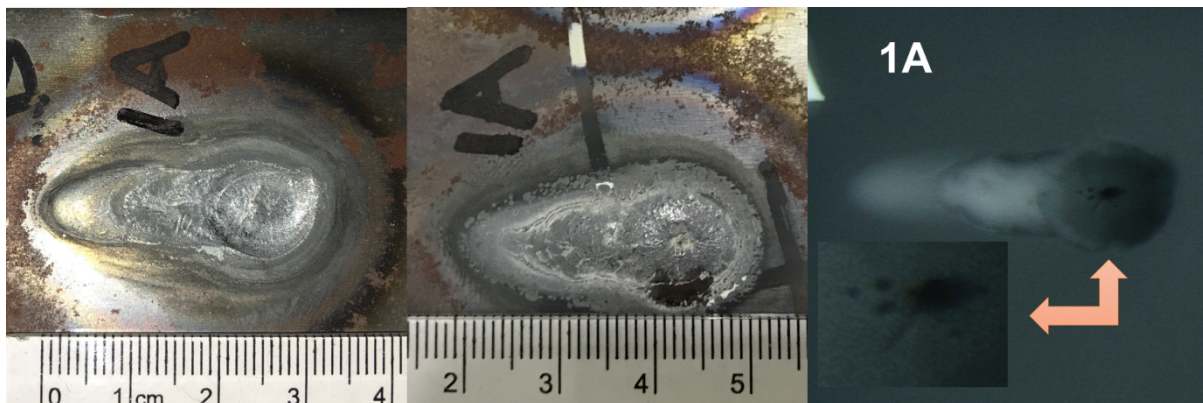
Photos of weld cap/ root of trial 1A and radiographic inspection result.
